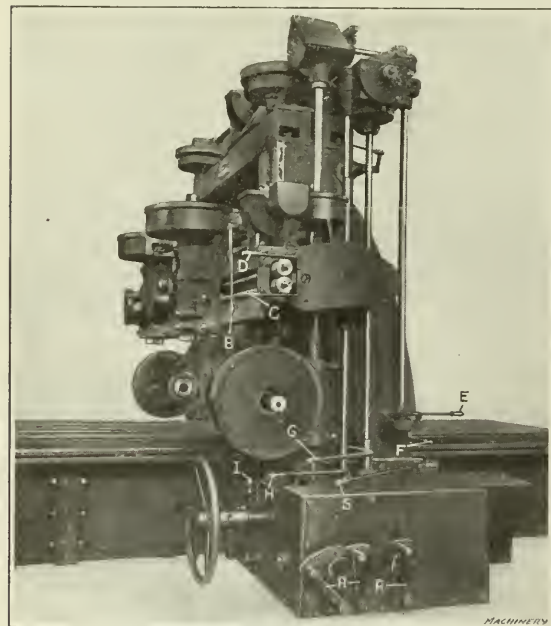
Newton Planer Type Multiple-spindle Milling Machine
